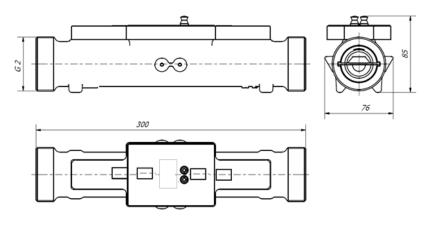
Dimensions of flow sensors G2" , L=300 mm
